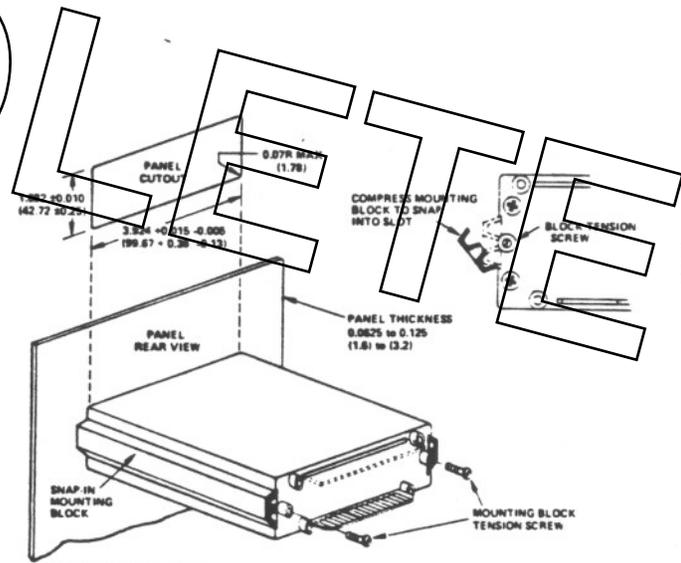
AD2022 Mechanical Outline (Dimensions shown in inches and (mm))
